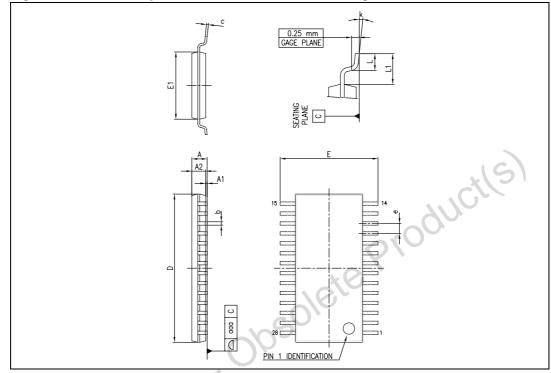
TSSOP28 pitch 0.65 mm mechanical drawing
